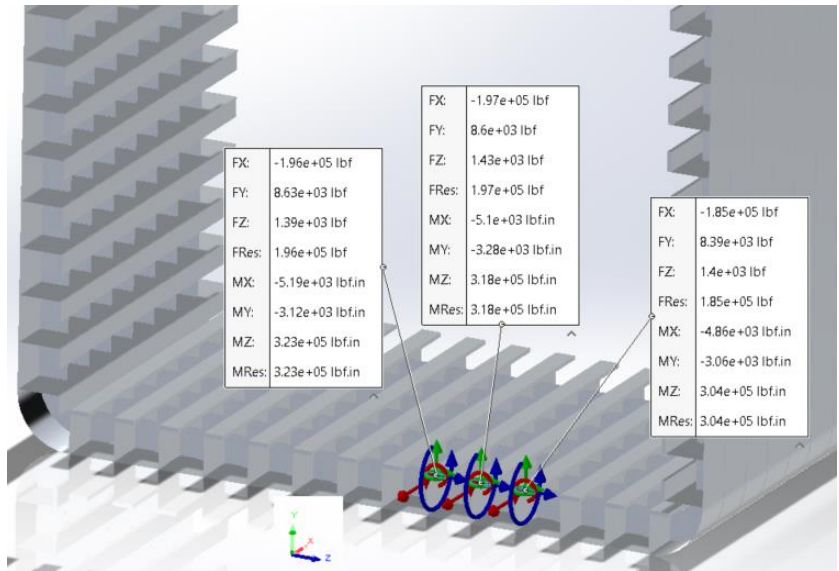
1st Segment, Beams 4, 5 & 6, Loadings, Closest to Front Face
